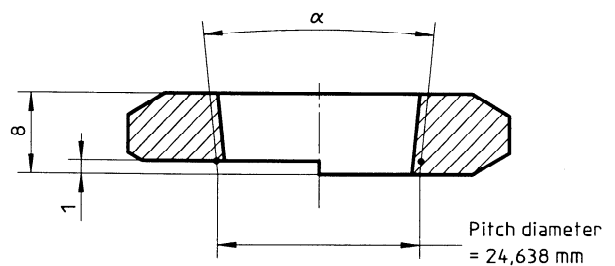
Threaded ring gauge for pitch diameters "I-10"
